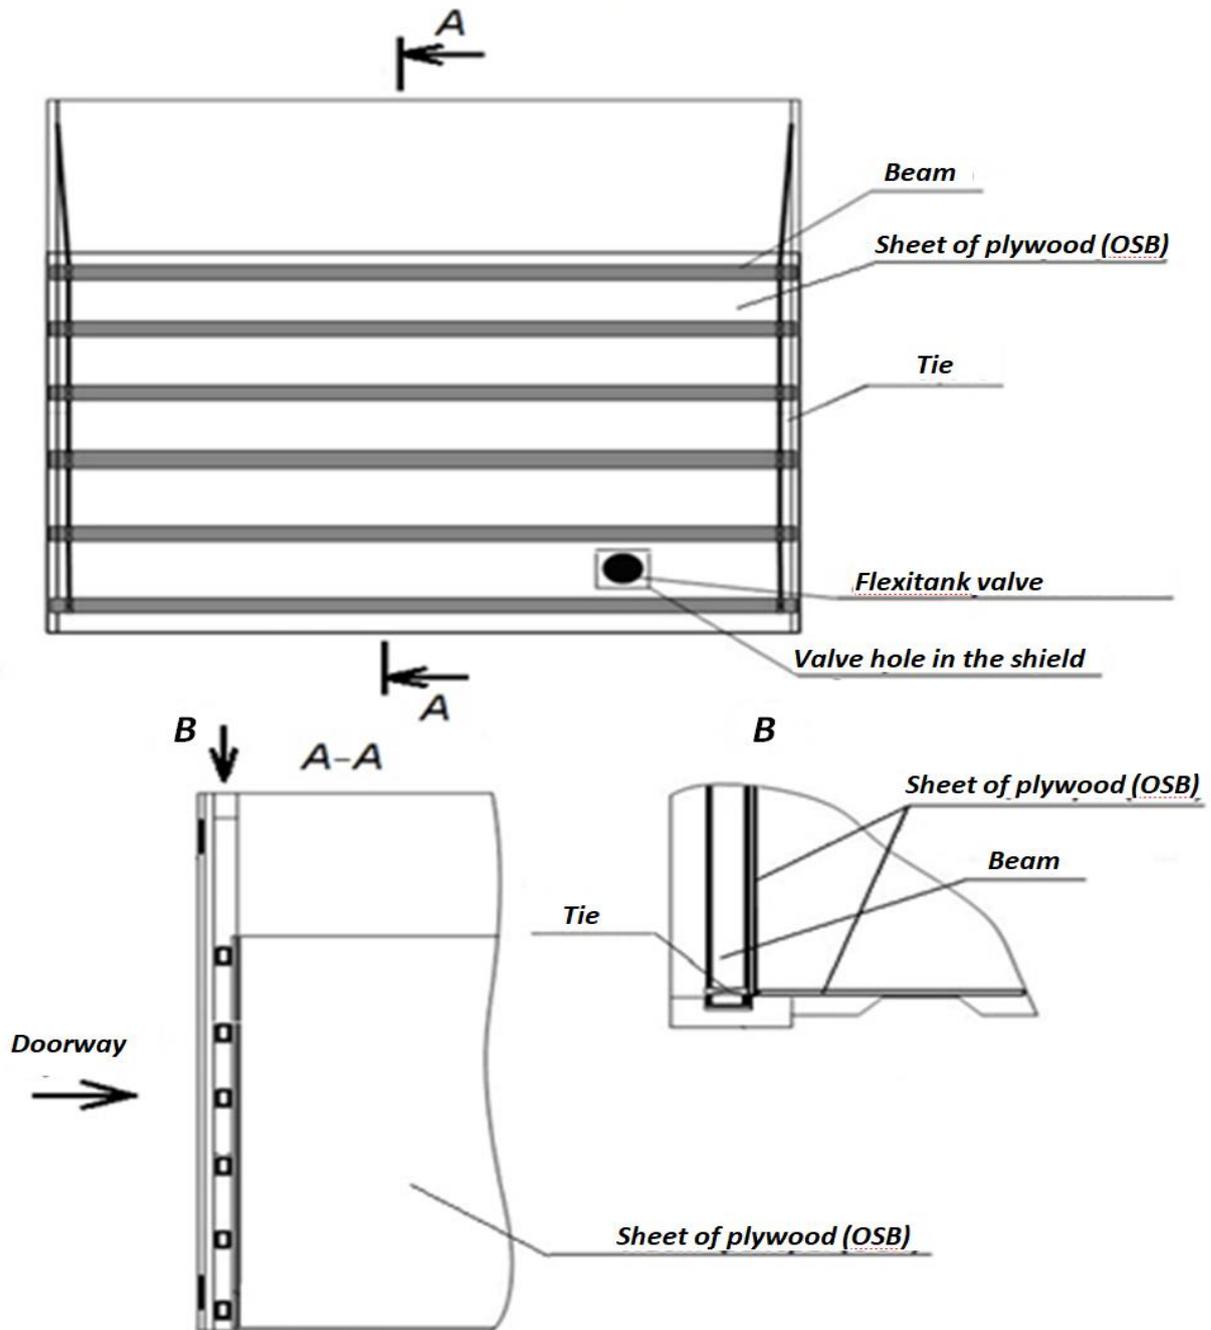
Shielding of the doorway opening in a container with grooves in corner posts
